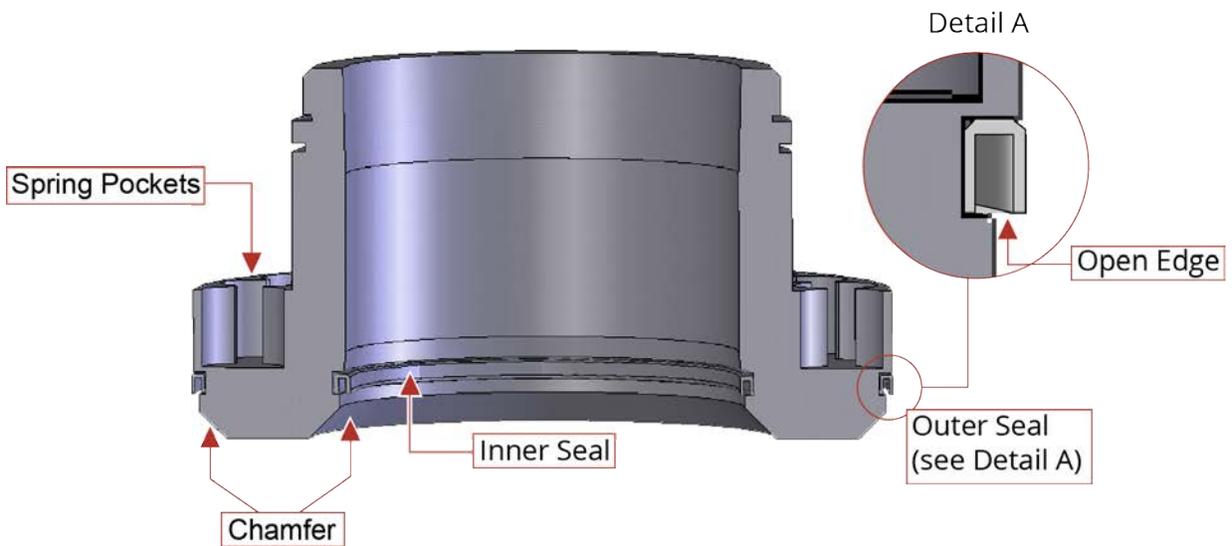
Cross-Section View of Piston Showing Seal Orientation
